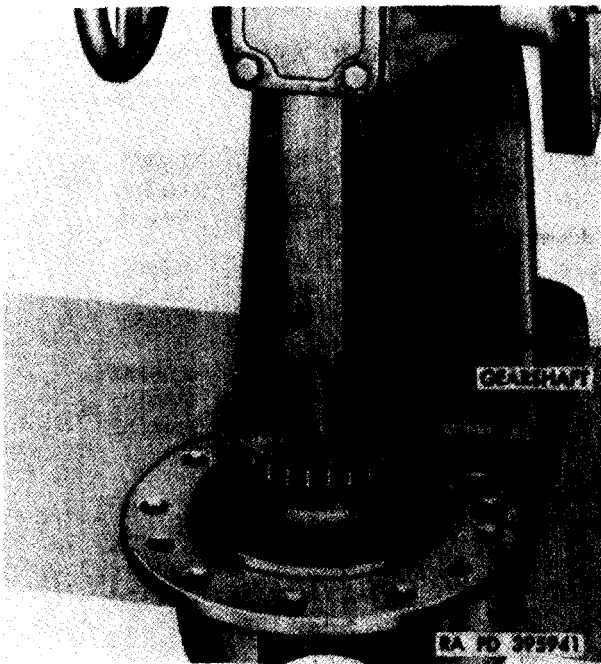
Pressing bushing-type bearing from transmission drive gearshaft.
